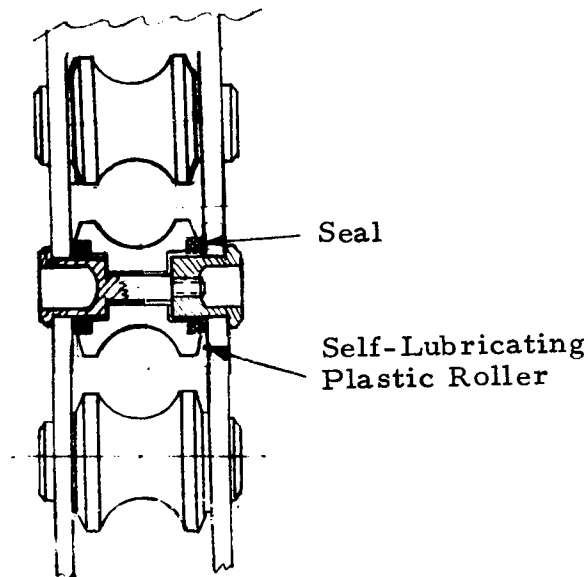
Alternate Planetary Roller Design with Free 360 Degree Rotation but Friction-Type Bearings
